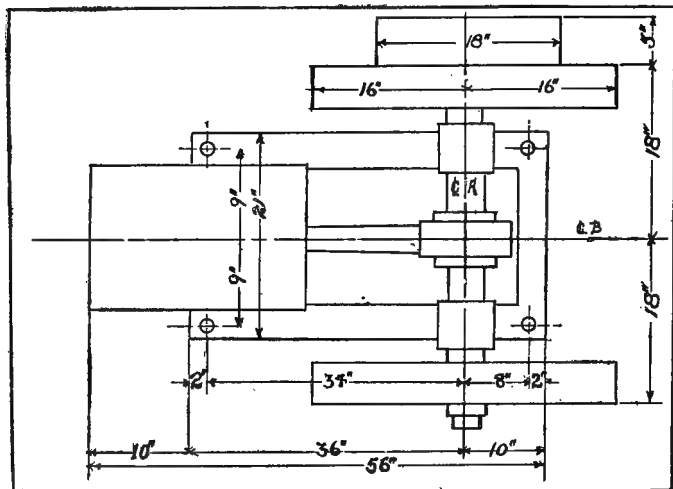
Gasoline Engine Base Plan to Show Amount of Space and Holes Needed for Installation.
